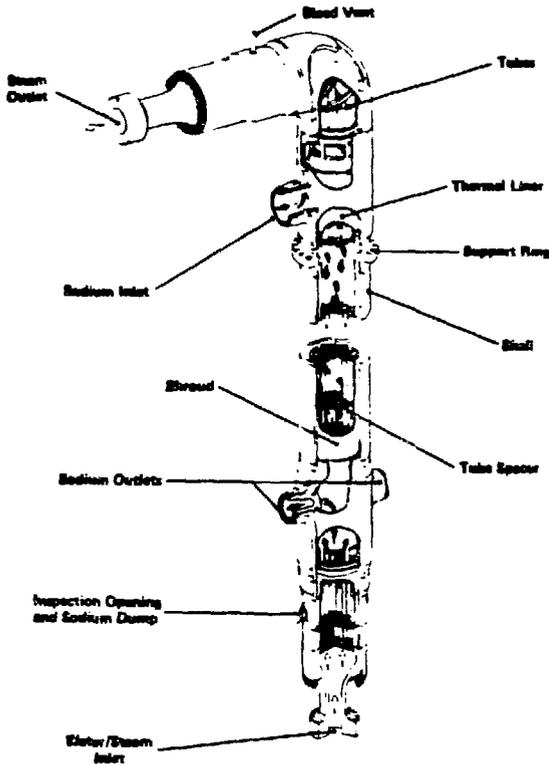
CRBRP STEAM GENERATOR - PROTOTYPE
